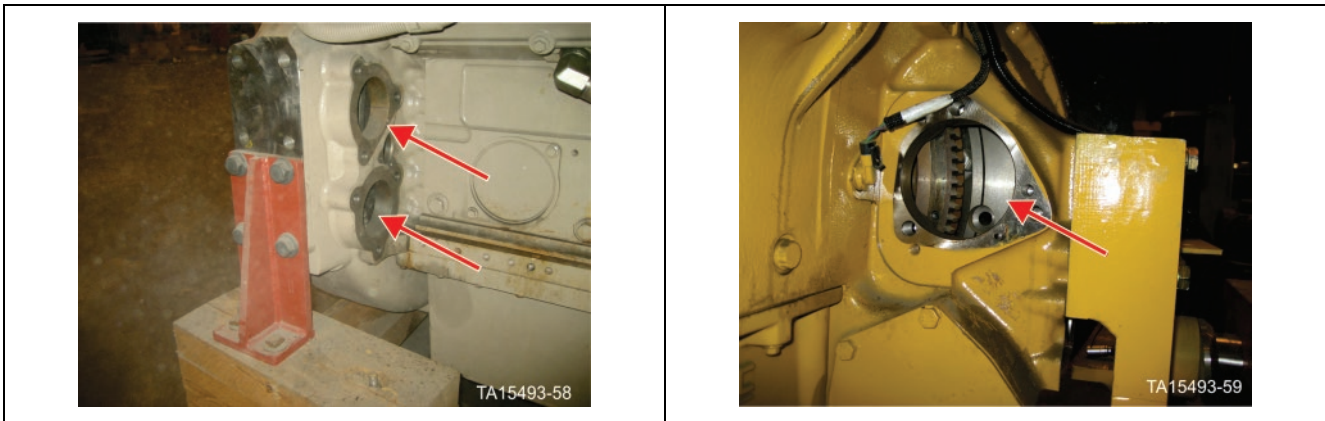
Remove Cover/Starter to Access Back Side of Flexplate
